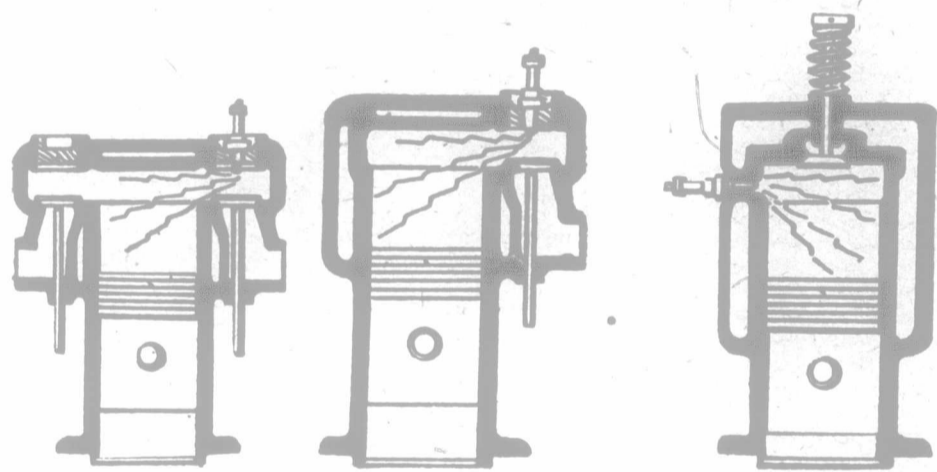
T-head Engine. Fig. 2—L-head Engine. Fig. 3—Valve-in-head Engine.
